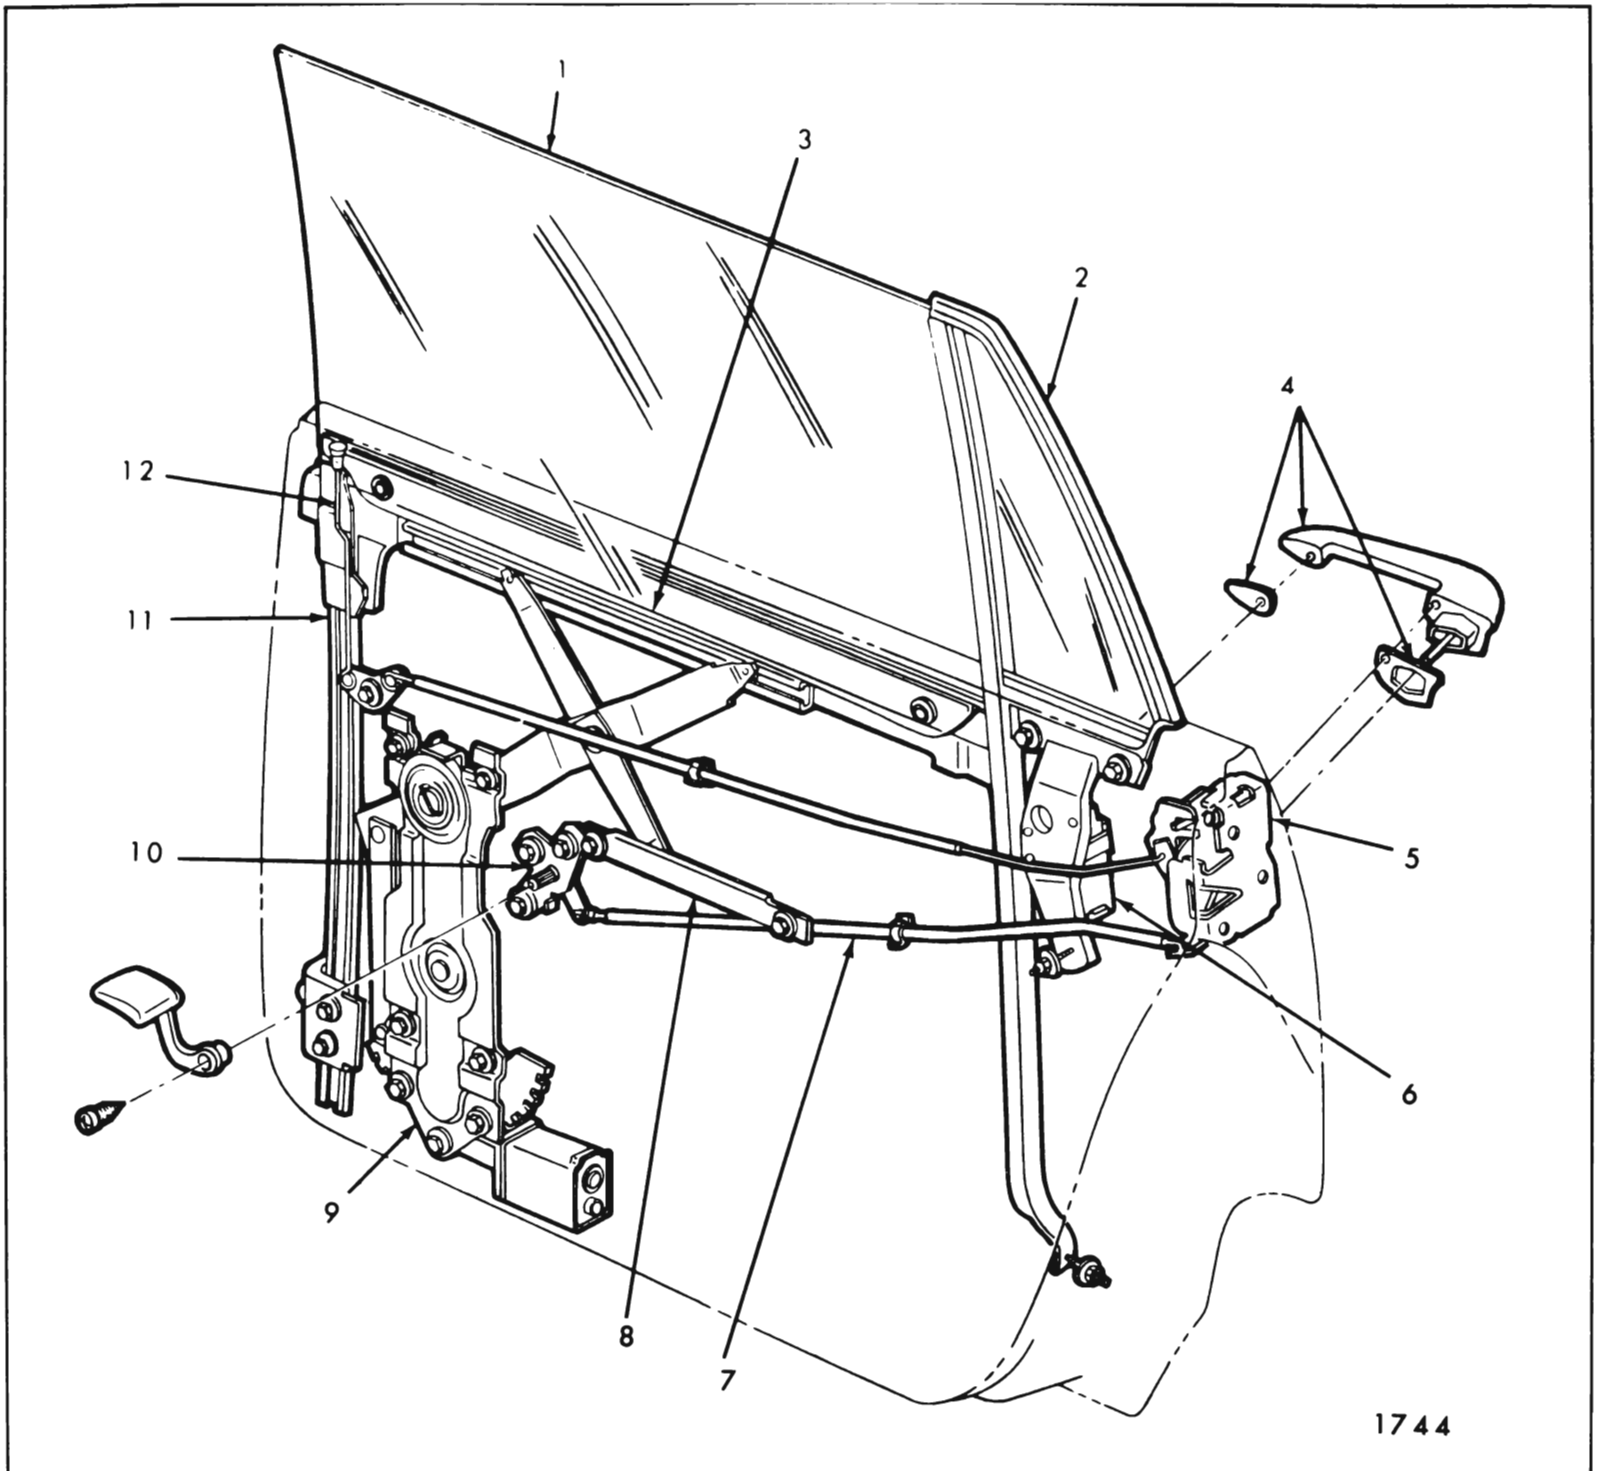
Rear Door Hardware - 68069-68169 Styles
